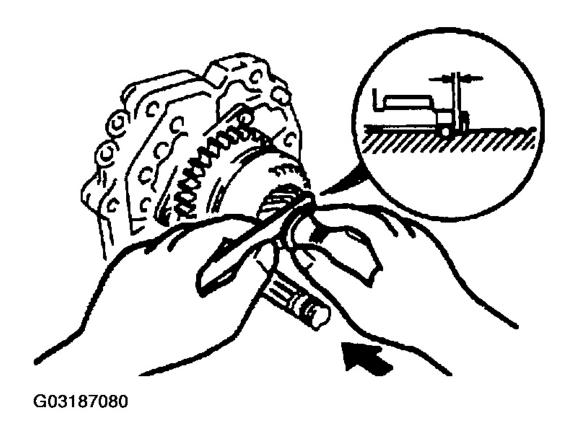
Measuring Clearance Between Thrust Lock Washer & C-Washers Courtesy of MAZDA MOTORS CORP.
